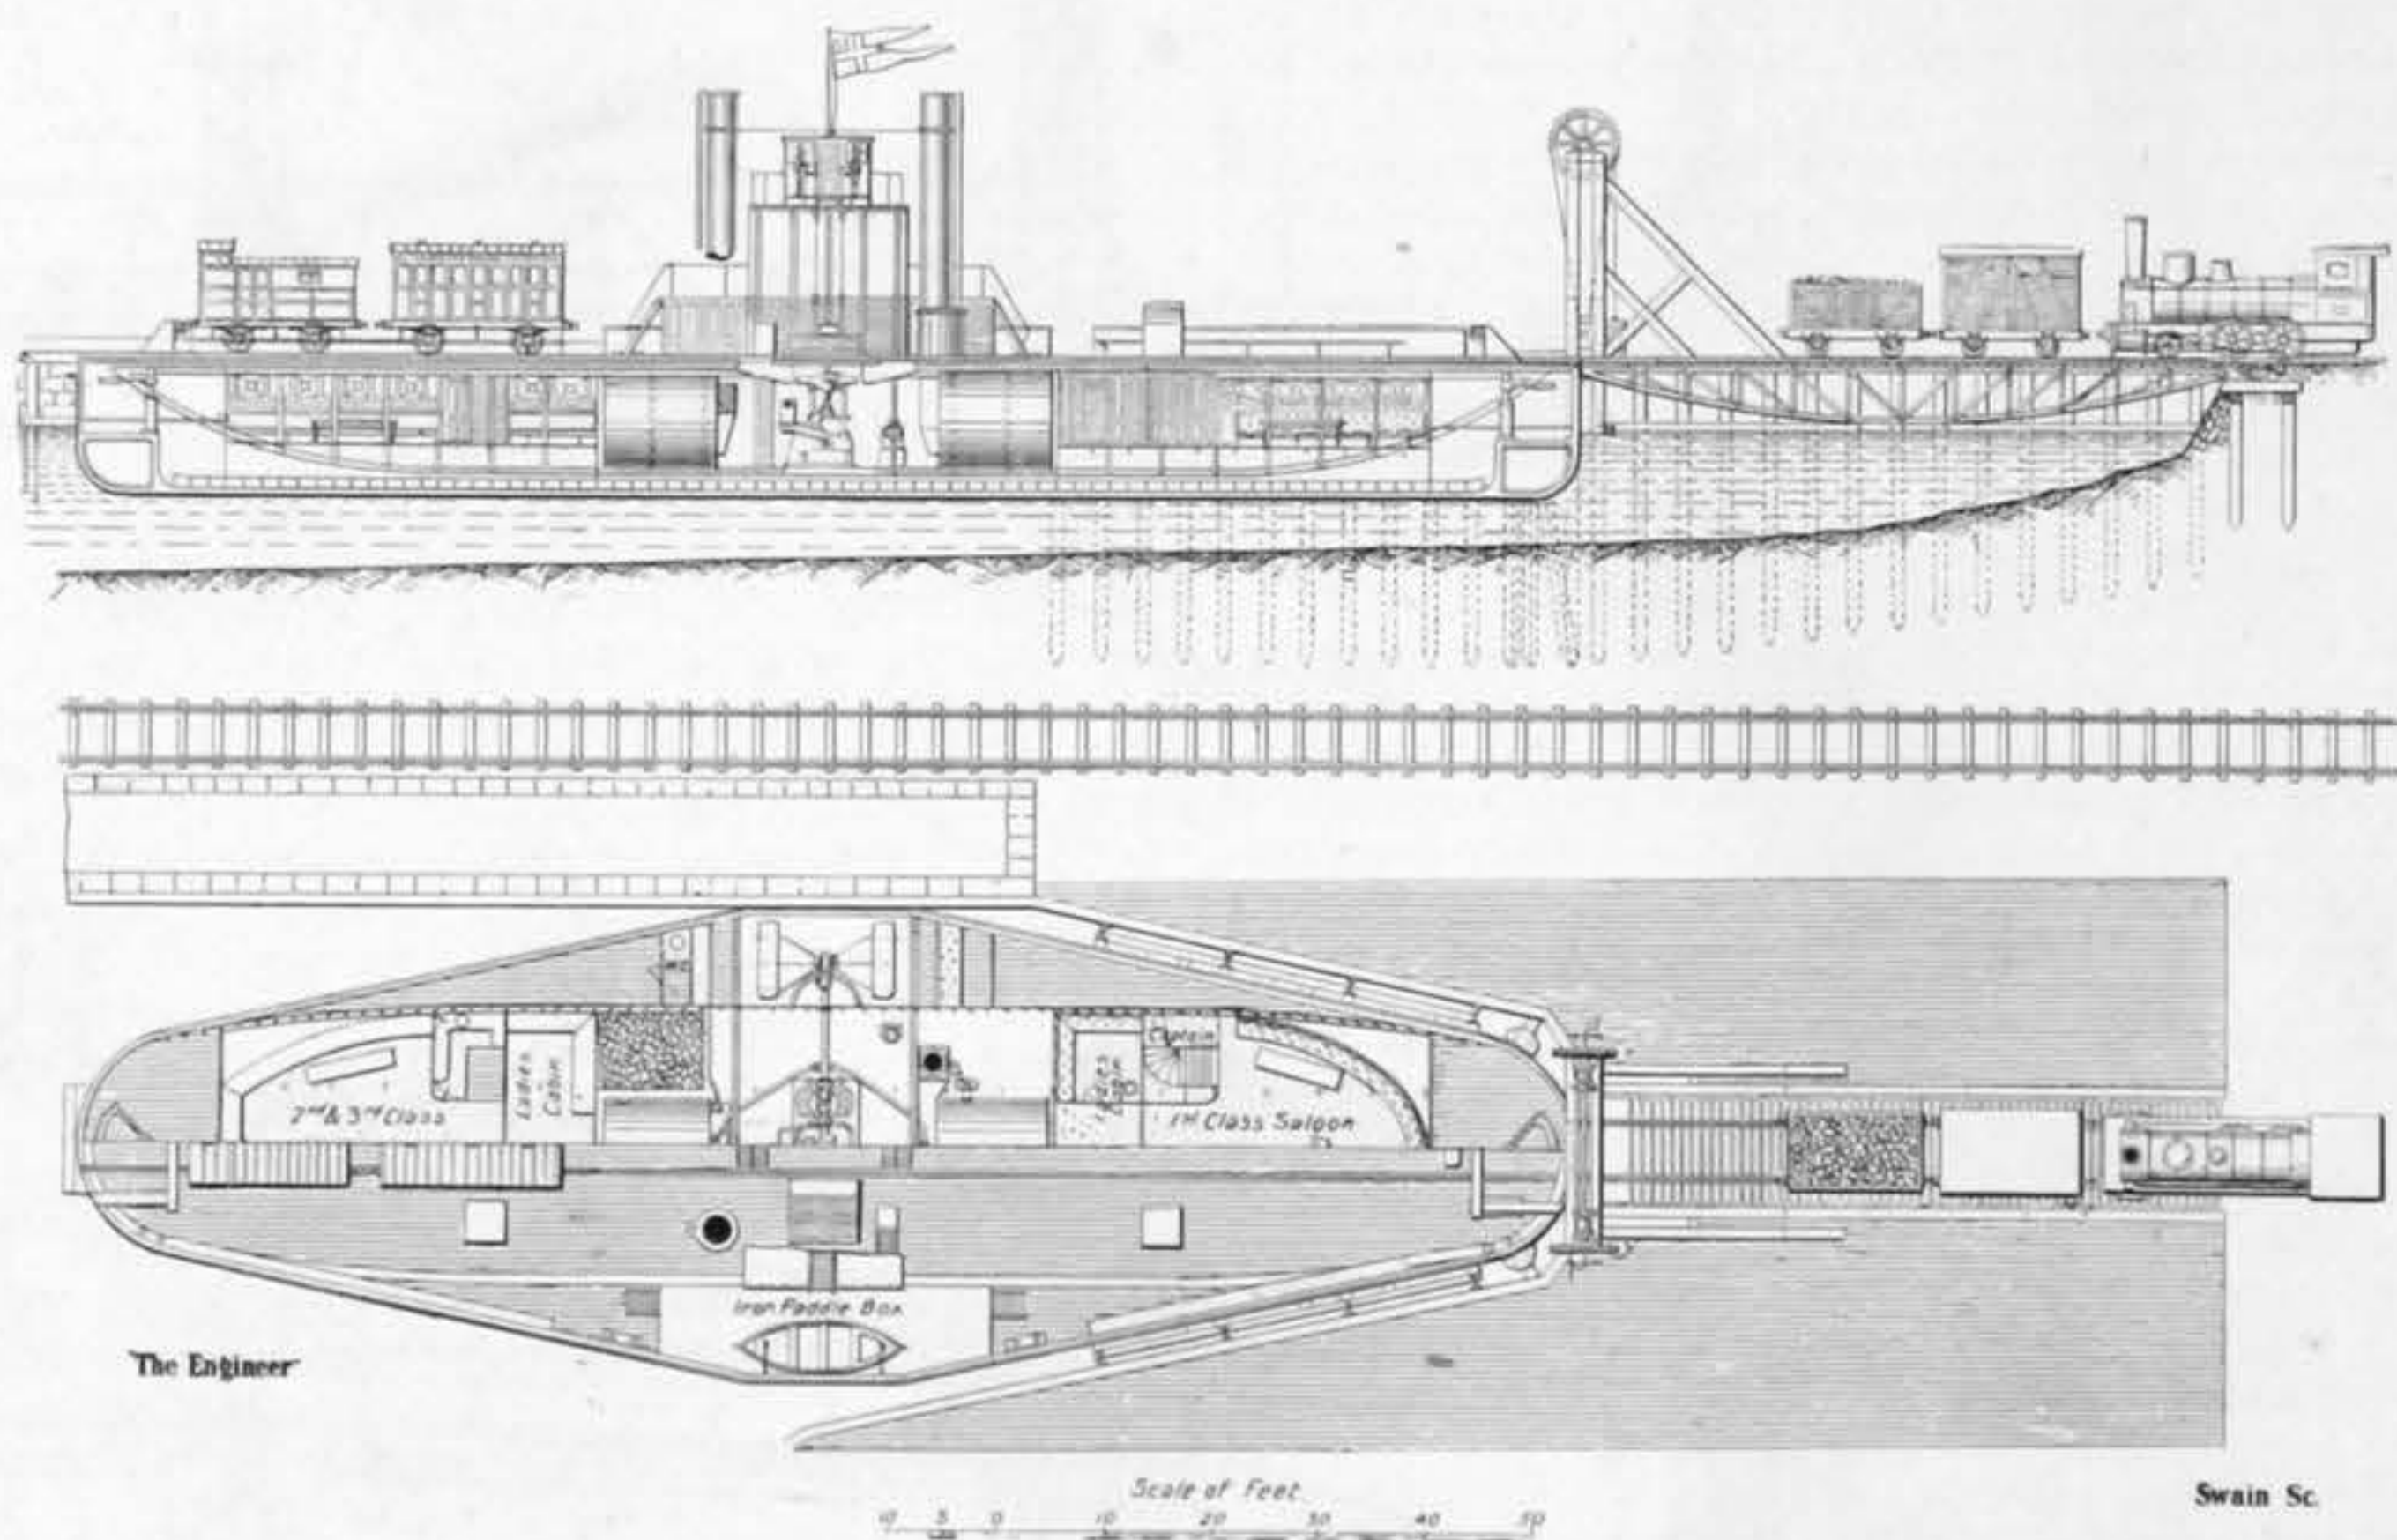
THE TRAIN FERRY STEAMER LILLEBELT
